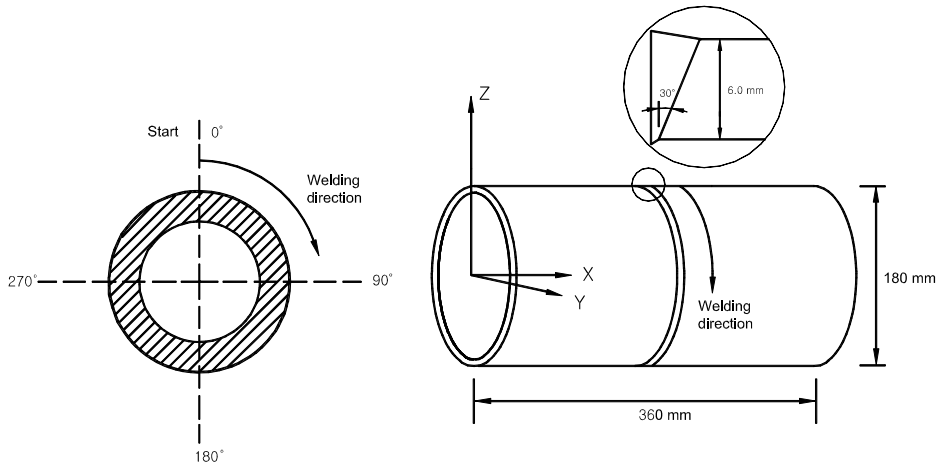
Dimensions of the analysis model and the welding direction
